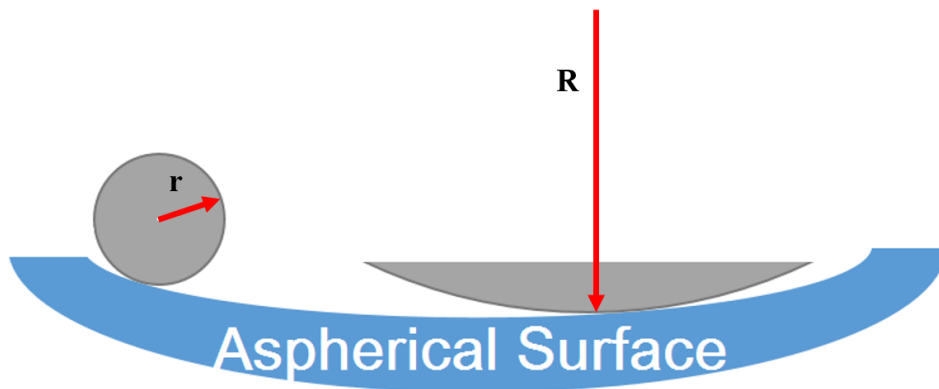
Schematic diagram of aspherical misfit, changing the radius of the tool could reduce but never eliminate the misfit.
